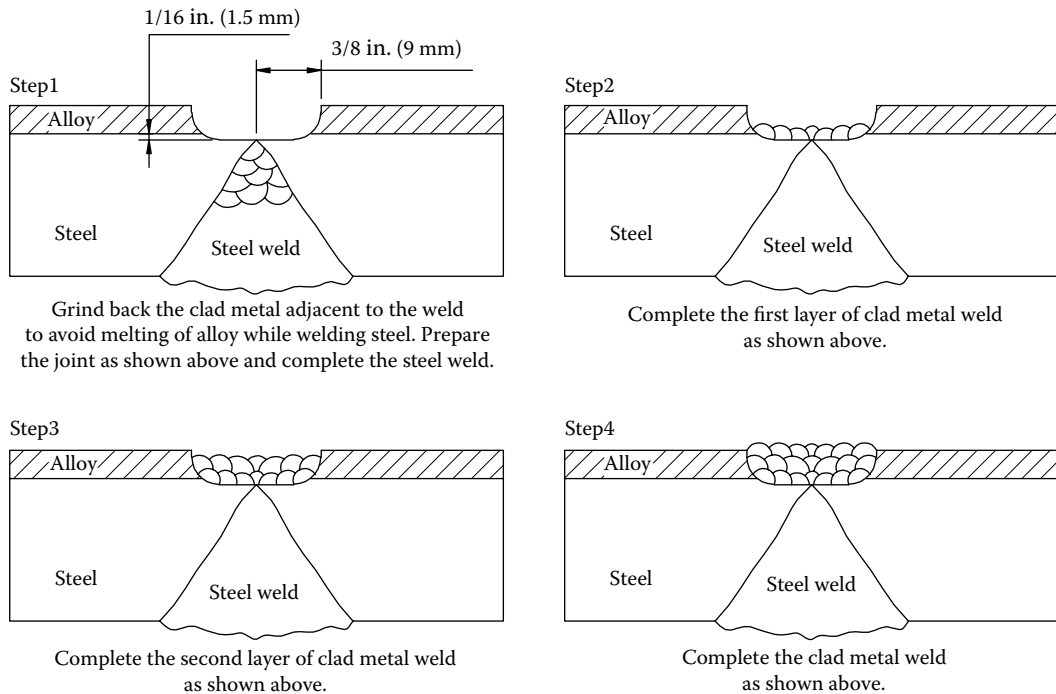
Method of welding of steel plate clad with Hastelloy.
